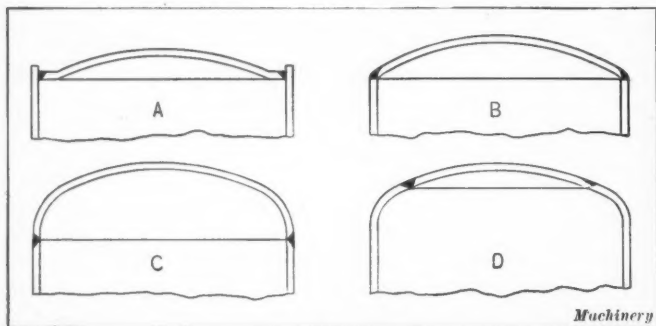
Proper and Improper Methods of welding Drum Heads
